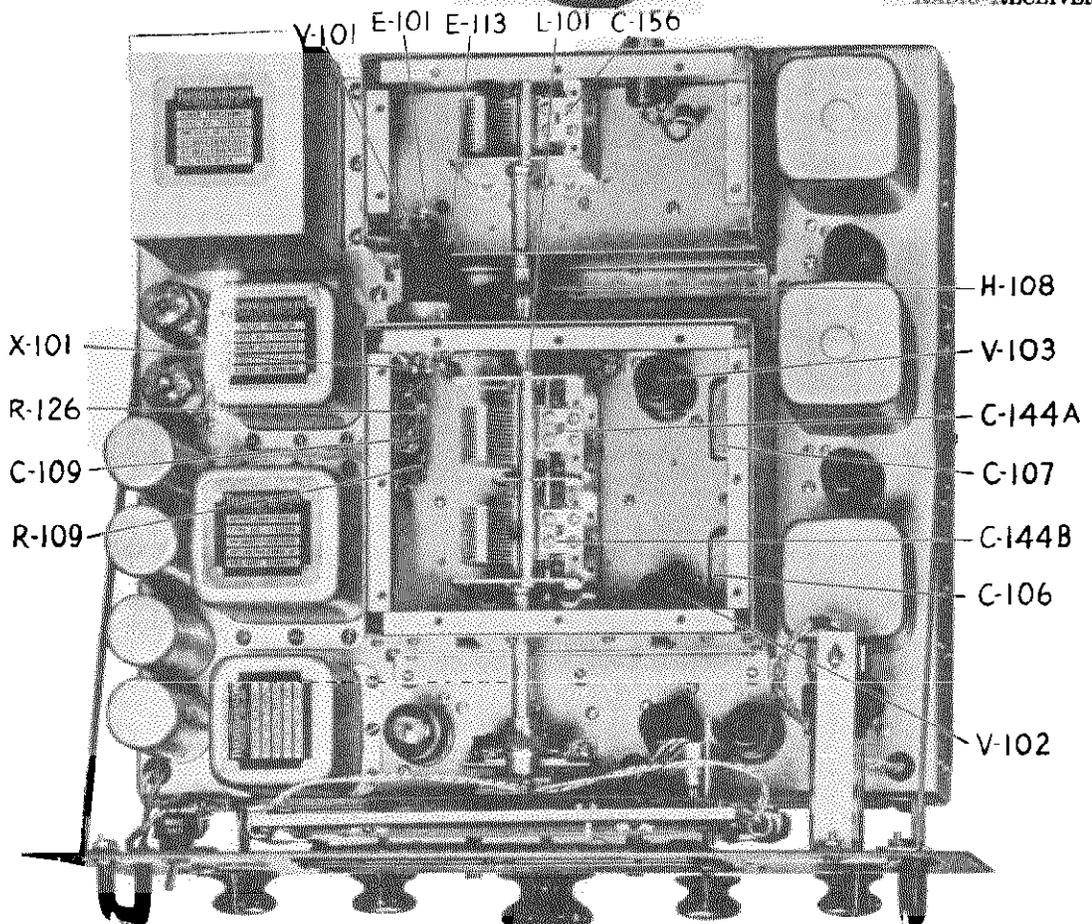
TOP VIEW, RADIO RECEIVER CHASSIS. COMPARTMENT SHIELD COVERS REMOVED.
